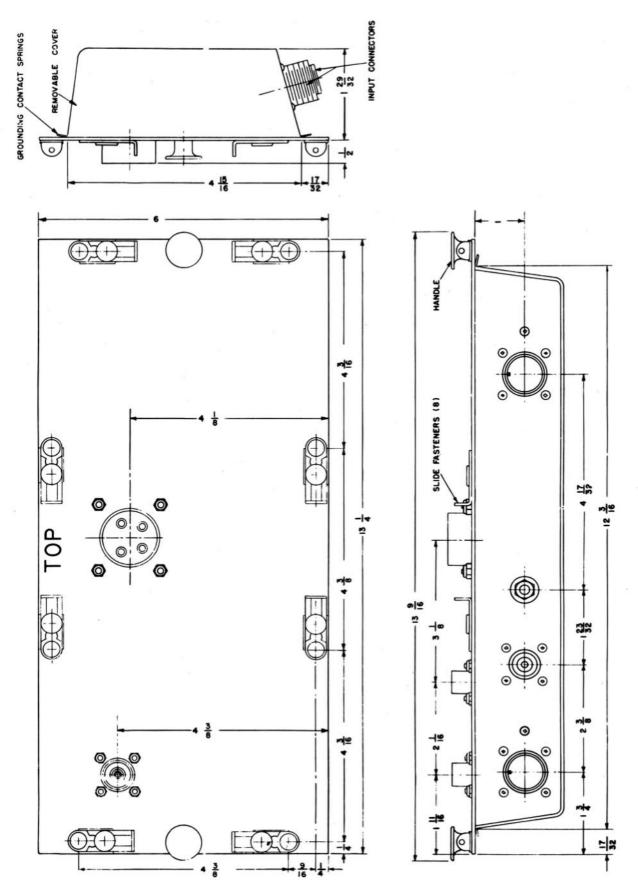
8. Low-Pass Filter F—304/URR—35 C, Outline Drawing
